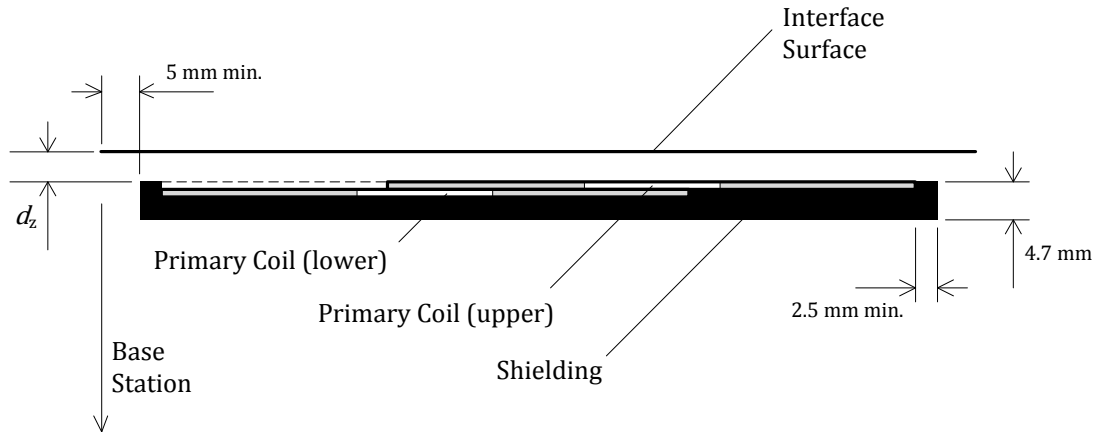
Primary Coil assembly of Power Transmitter design A14
